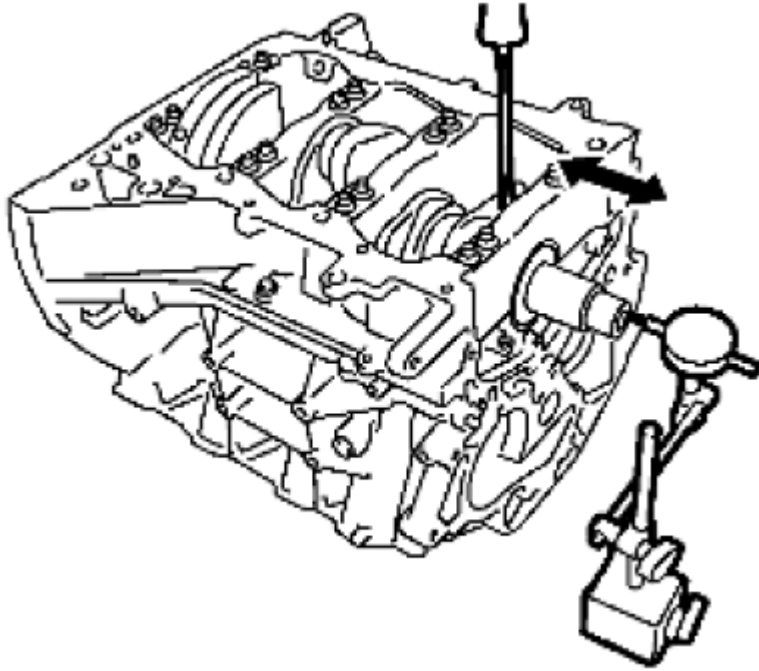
Measuring Clearance Between Thrust Bearings And Crankshaft Arm
